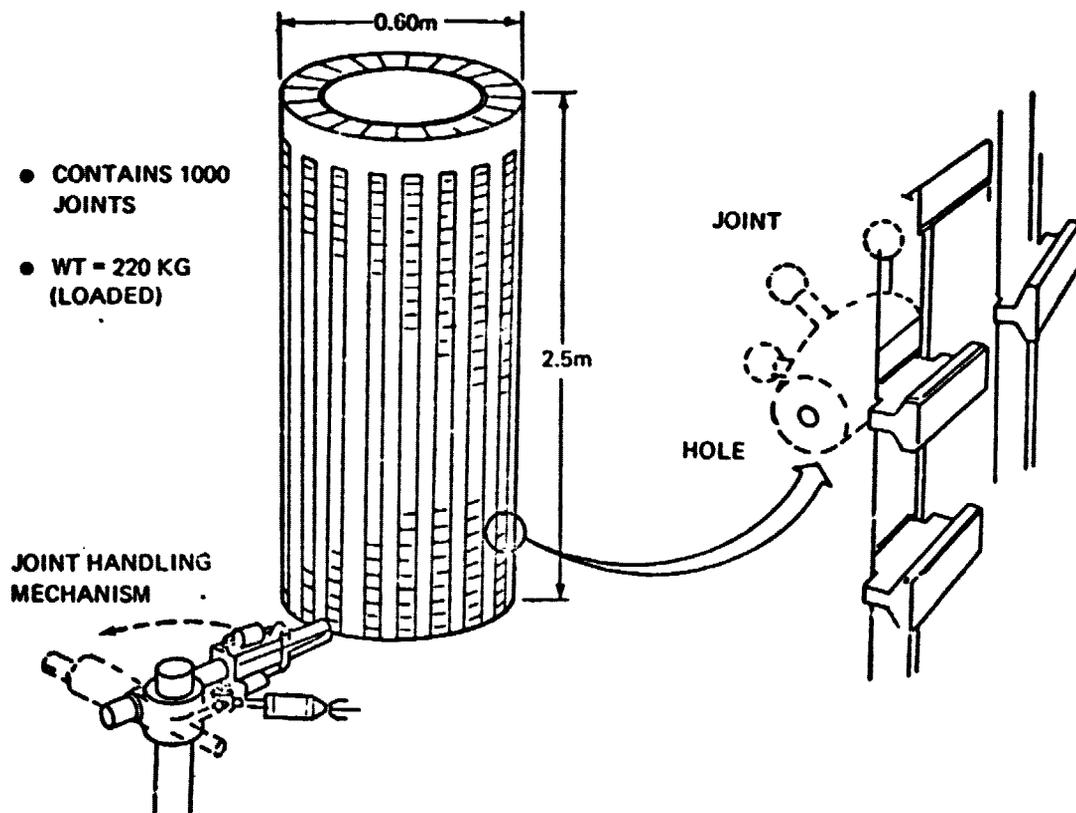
Carrousel Packaging Concept for Strut Joint Fittings
